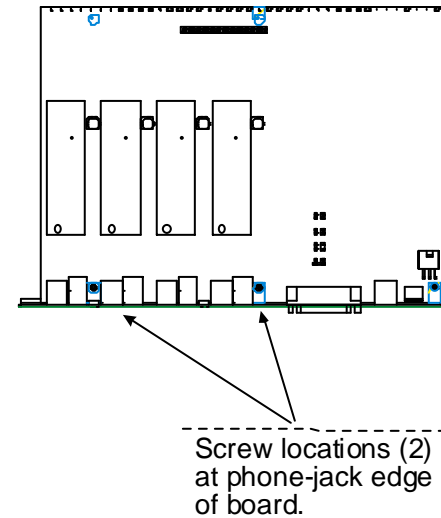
Screws to be replaced with standoffs (phone-jack edge of board; top view)
